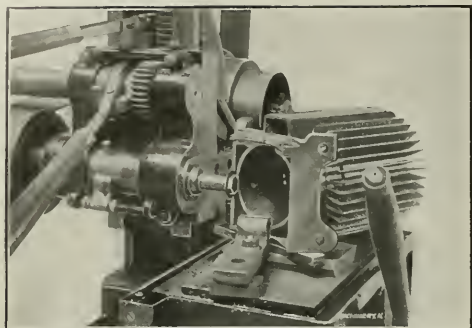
A Small Cutter Working on a Cylinder Casting.
